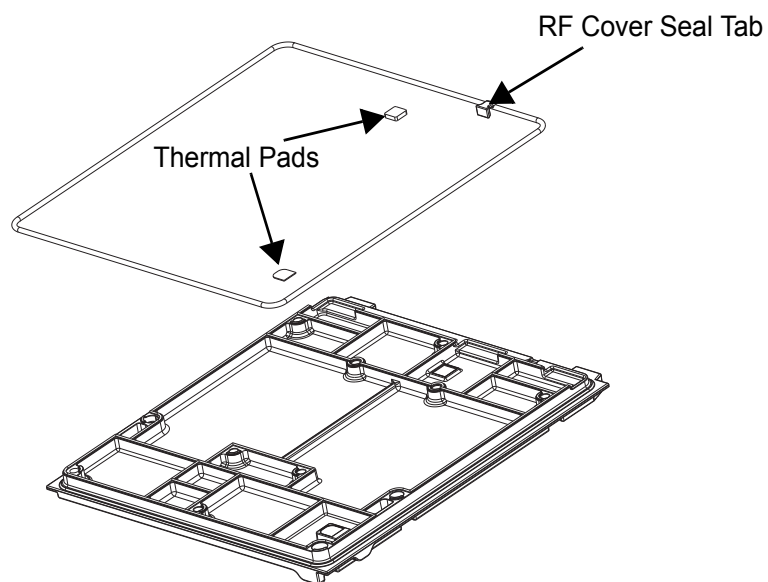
Inspecting the Thermal Pad and Installing the Cover Main Seal
